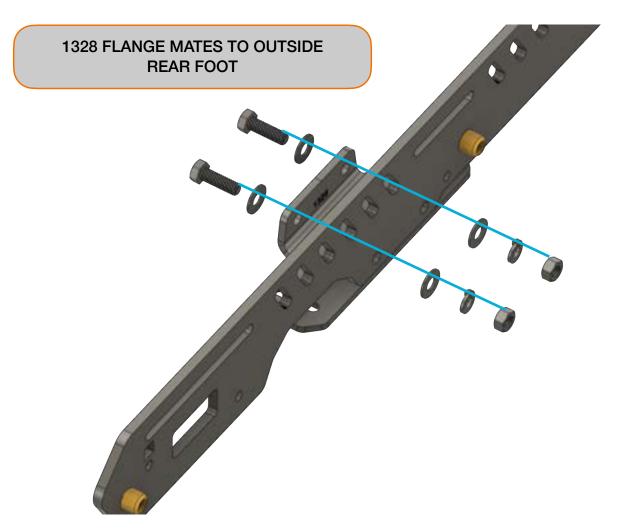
1328 Foot Driver Side (1041) Shown REAR Location
